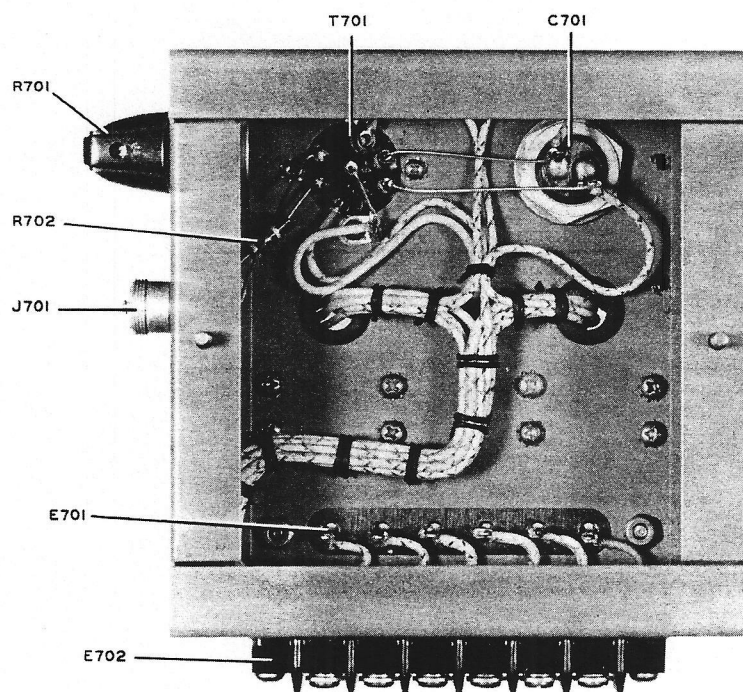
Type 175V-2 Relay Unit Parts Arrangement - Bottom
